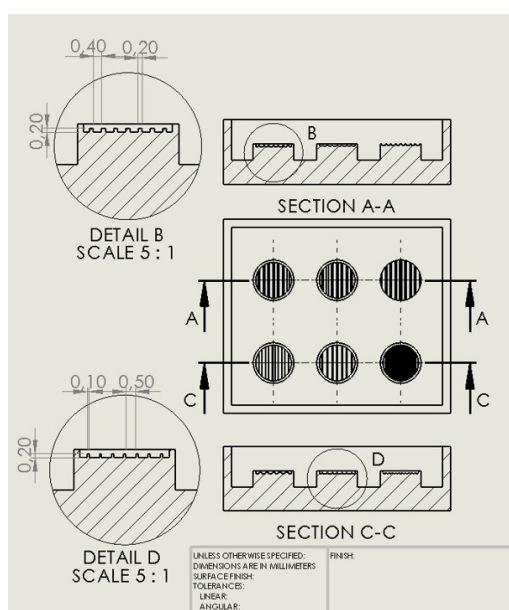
Technical drawing in Solidworks® of the positive mould highlighting patterns B and D for cell culture. The poured and cured Ecoflex™ 00-30 mould will be extracted from the 3D-printed mould and employed as the inverse mould for the hydrogels produced within it.
